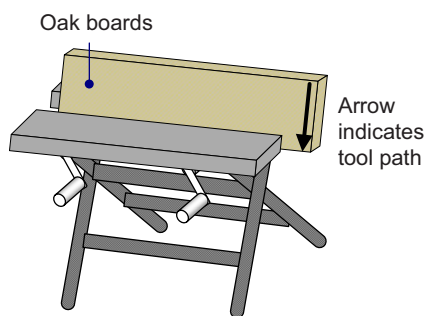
Test jig for supporting an oak board to test reciprocating saws.
